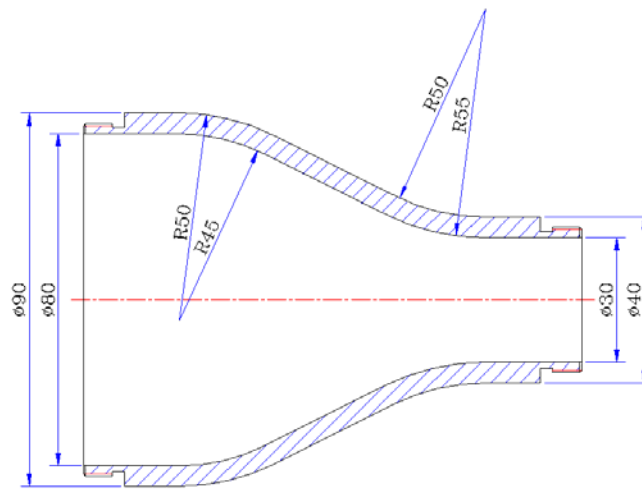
Subsonic nozzle and swirl generator assembly (mm)
